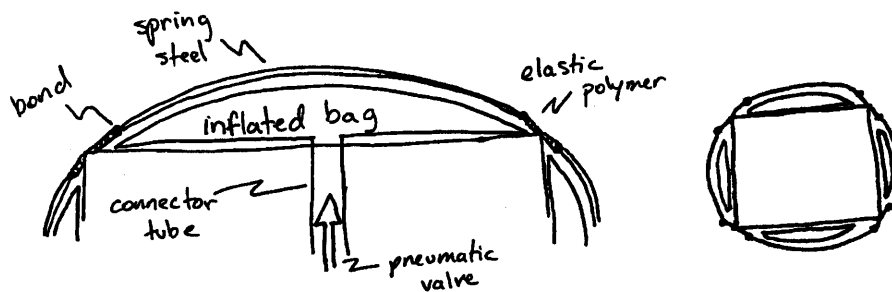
Drawing of four-bag rubber-spring steel interface design.
